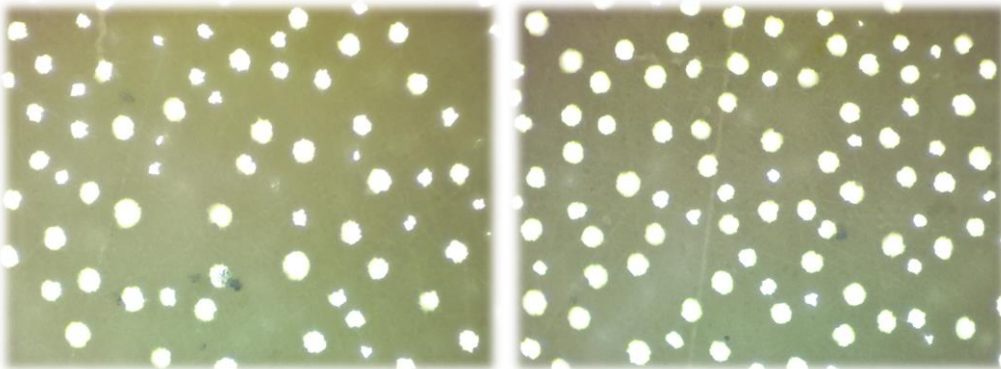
Pictures with 10x lens of bottom surface with 50 and 68 μ m of material removal.
